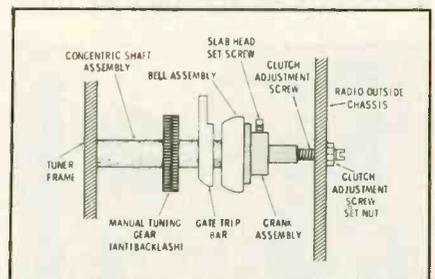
The clutch/anti-backlash gear assembly. (From "Automobile Electronics Servicing Guide", by permission of Howard W. Sams Co.)
